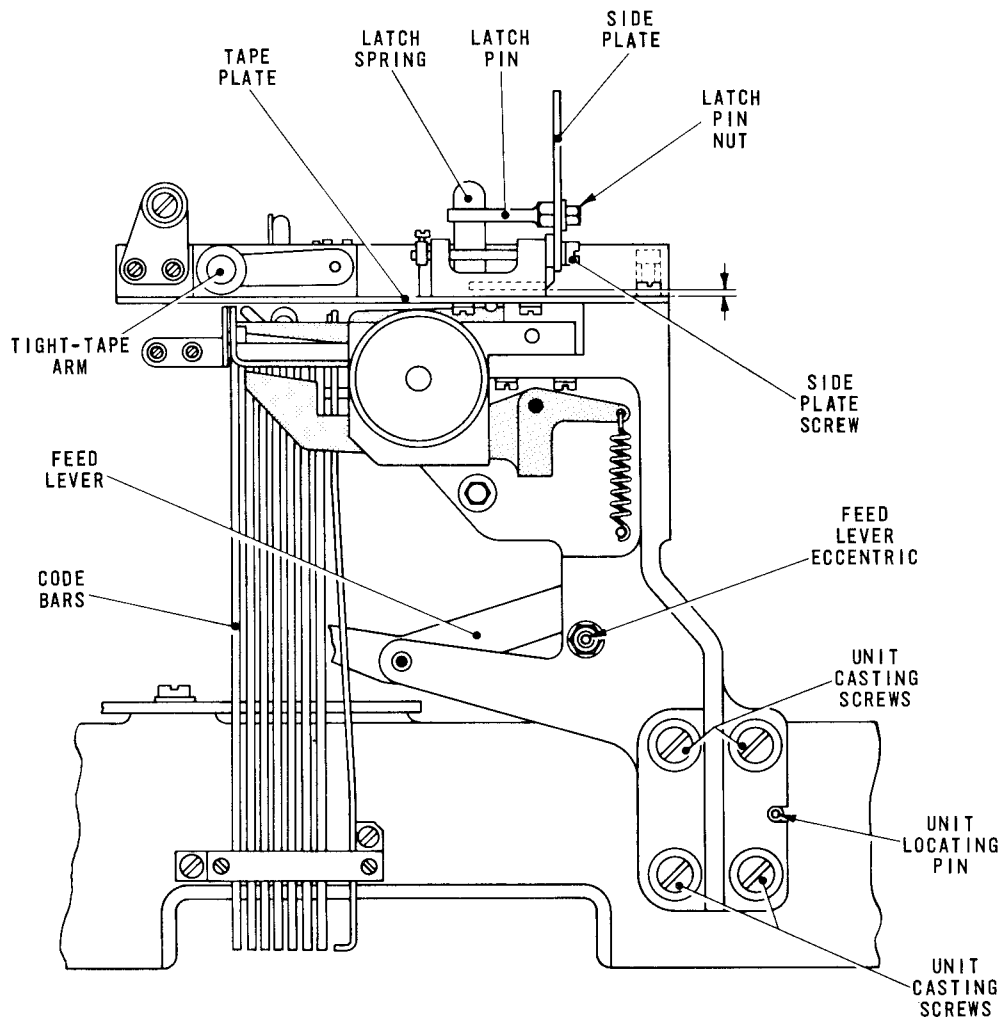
TAPE READER—RIGHT-HAND SIDE VIEW
